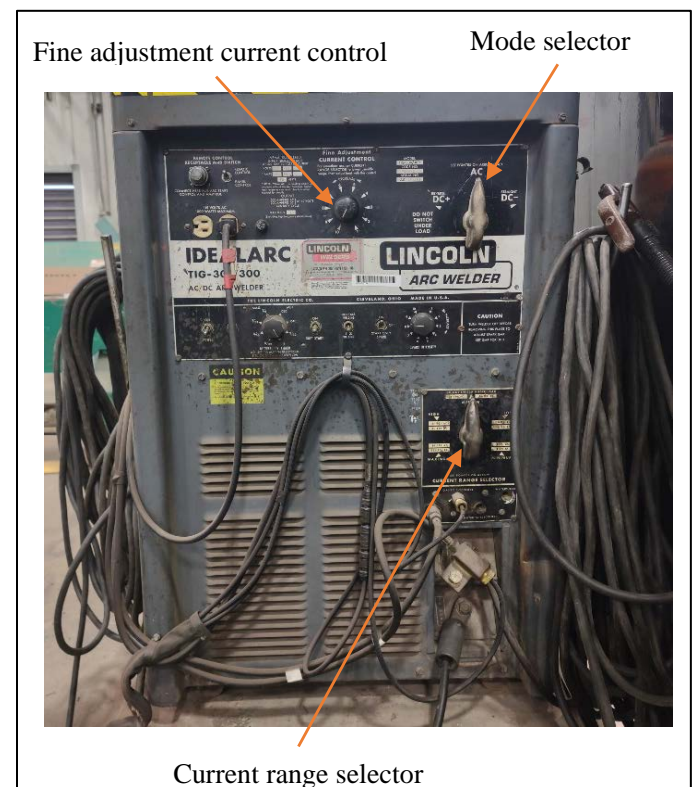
The shielded metal arc welding (SMAW) machine used for the test. It has three operating modes and five current level selections.
